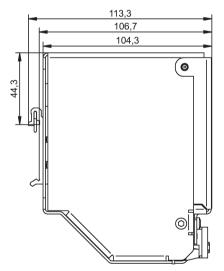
6EP4131-0GB00-0AY0 dimensioned drawing
